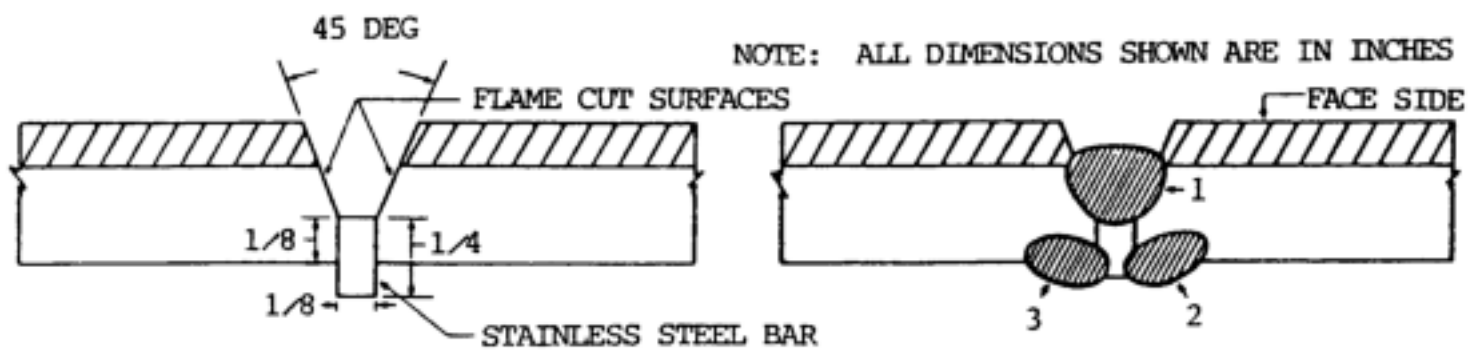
Procedure for welding face hardened armor up to 1/2-in., using the depressed joint method.
